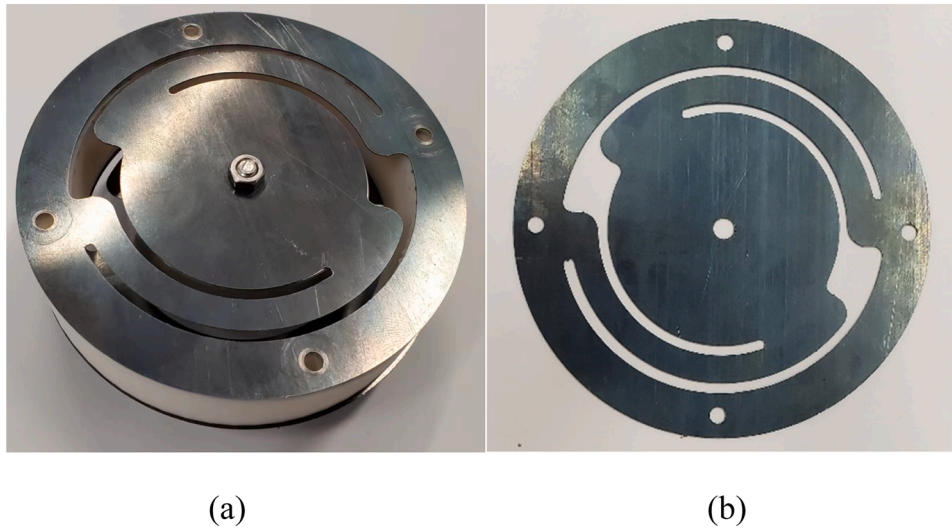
The designed (a) inertial mass system and (b) plate springs for the inertial mass system.
